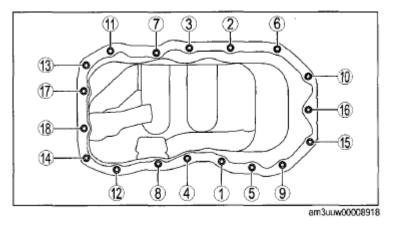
Identifying Oil Pan Mounting Bolt Tightening Sequence
